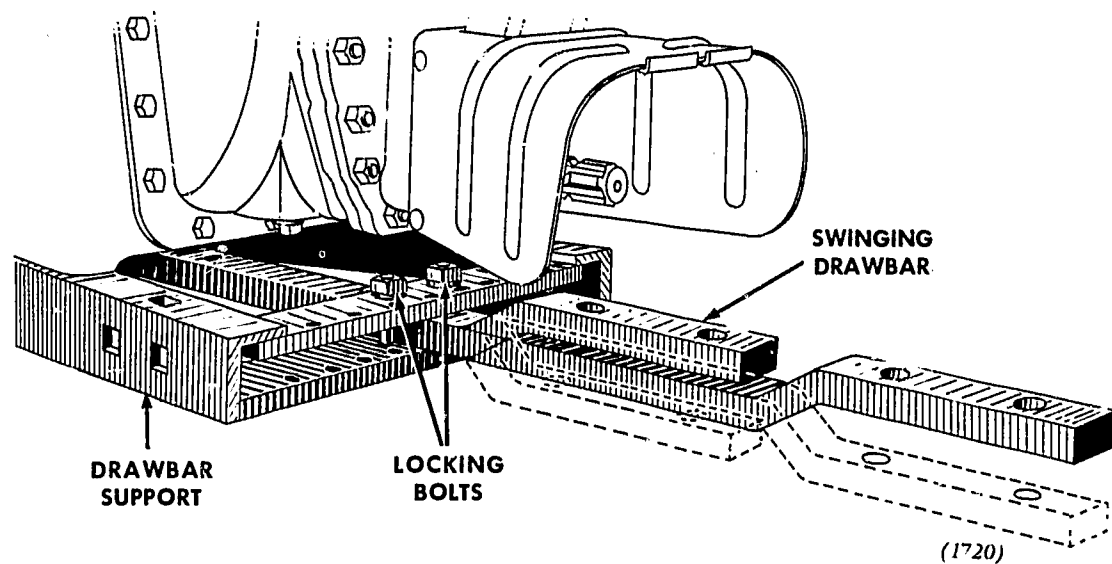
One type of drawbar with horizontal, vertical, and longitudinal adjustments that may be either locked into position or allowed to swing.
